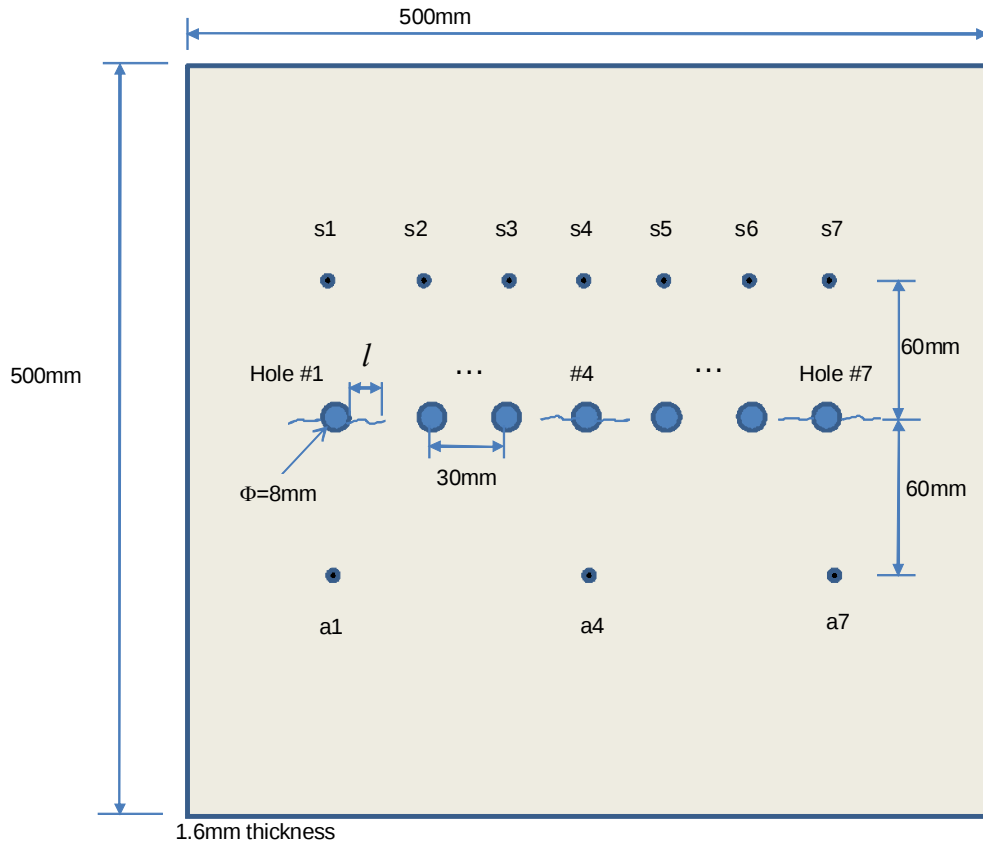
Active sensing system for an aluminum plate with riveted holes with cracks.
